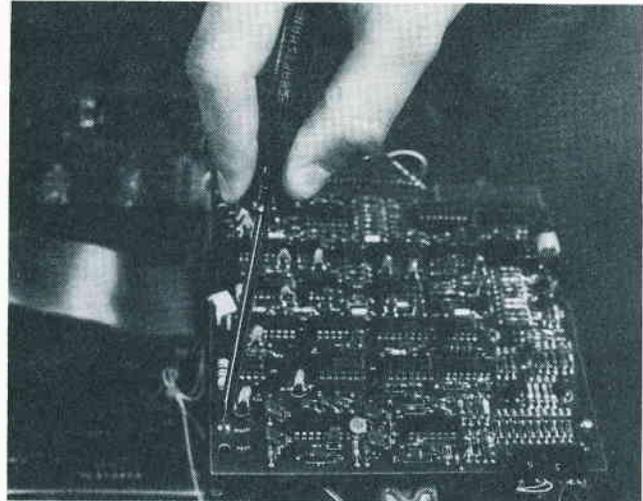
Remove the two Phillips screws holding the analog card on the drive mechanism.
